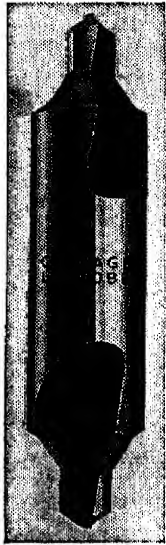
A combination center drill and countersink. (Courtesy Chicago-Latrobe Twist Drill Works.)
